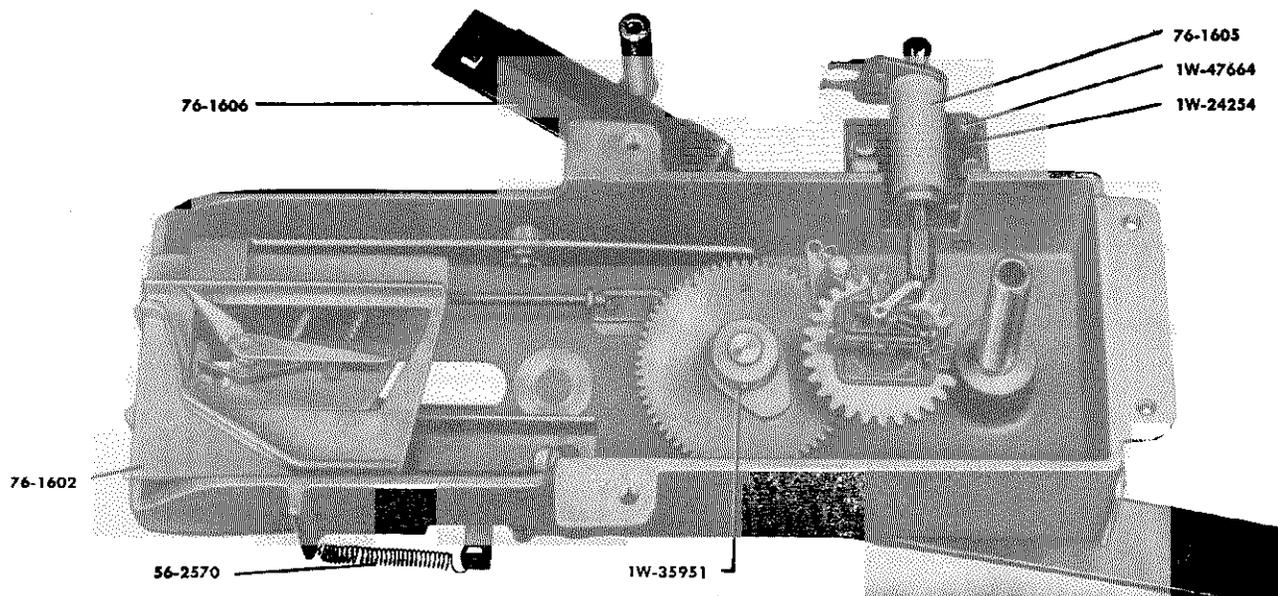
CHANGER MECHANISM ASSEMBLY, TOP VIEW.
